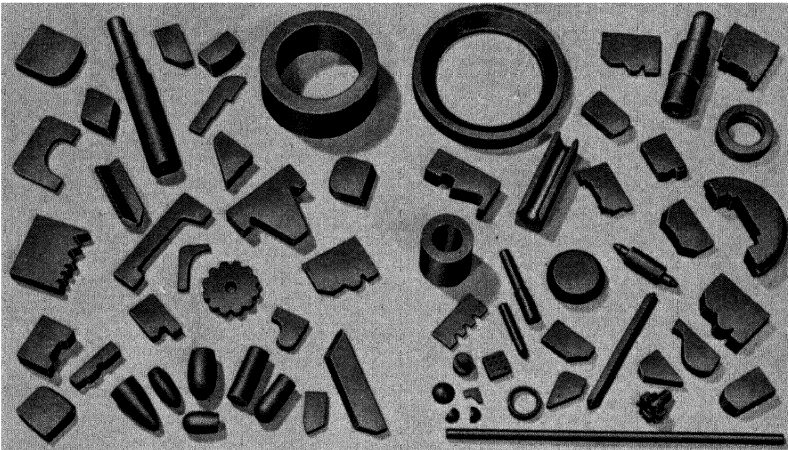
Assortment of special-shaped hard metal blanks of accurate form for use in wear-resistance applications (courtesy of Carboloy Co., Inc.).
